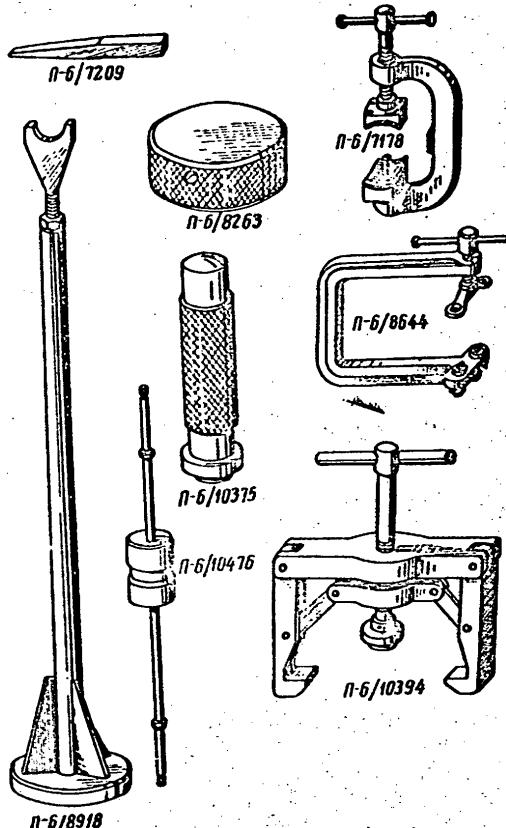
TOOLS AND FIXTURES FOR CRANKSHAFT ASSEMBLY
